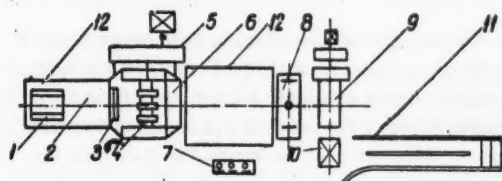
Diagram of disk shear 420 unit before mechanization: 1) box type uncoiler; 2) manually operated shears; 3) tensioning rollers; 4) disk shears; 5) multiple stage reducing gear; 6) edge trimmer; 7) principal control panel; 8) press table; 9) recoiler; 10) lifting table; 11) slide; 12) flooring.
